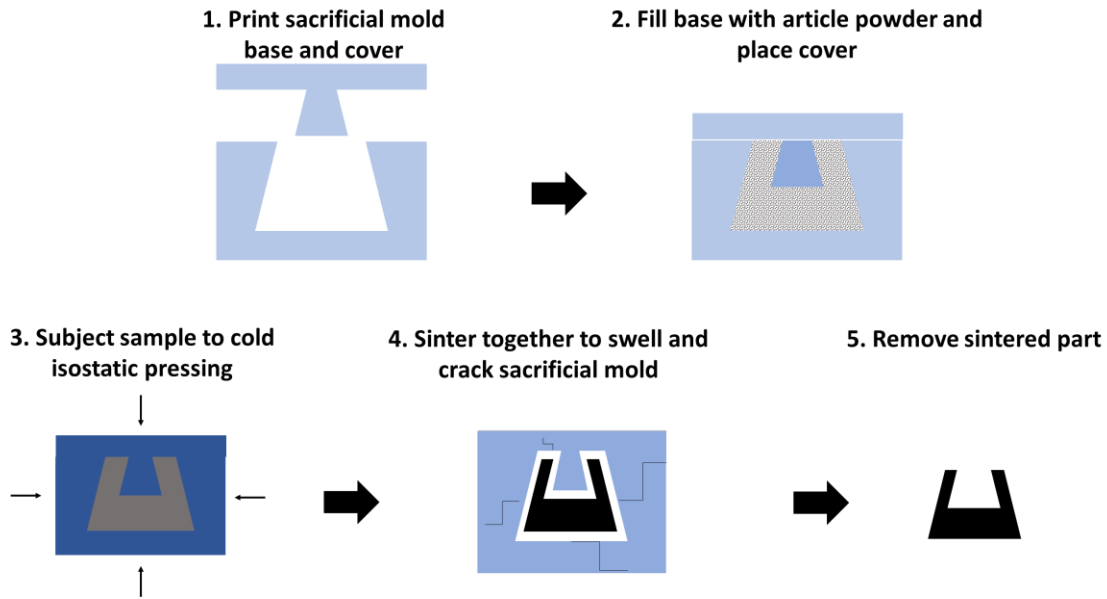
Schematic of the process of fabricating fully sintered 3D printed parts via AMSS.
